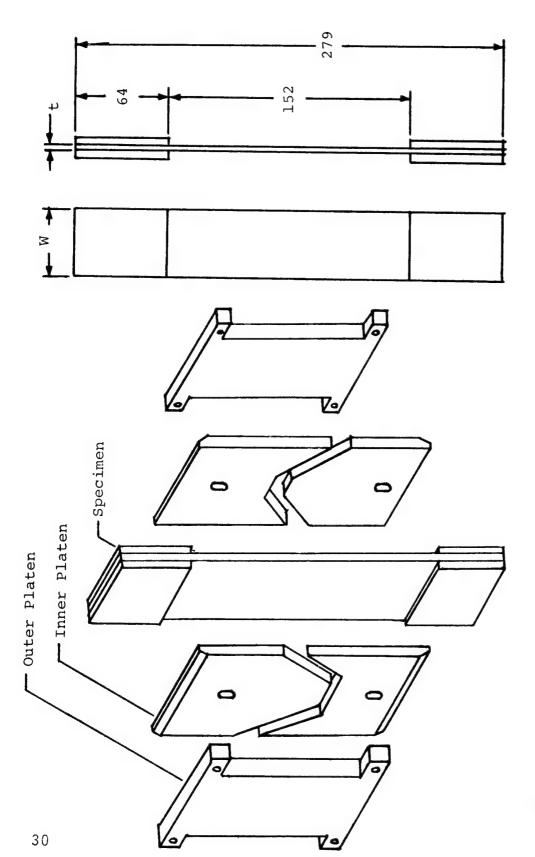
Exploded view of face-supported fixture with specimen and sketch of specimen.
